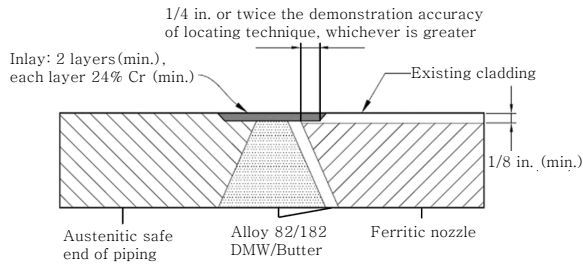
Repair design condition of Weld Inlay in reactor vessel In/Outlet nozzle⁶⁾
